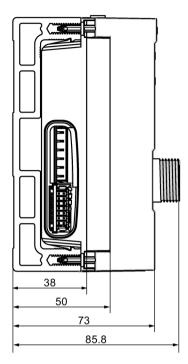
Dimensional drawing of the power module with CM PM 7/8" connection module
